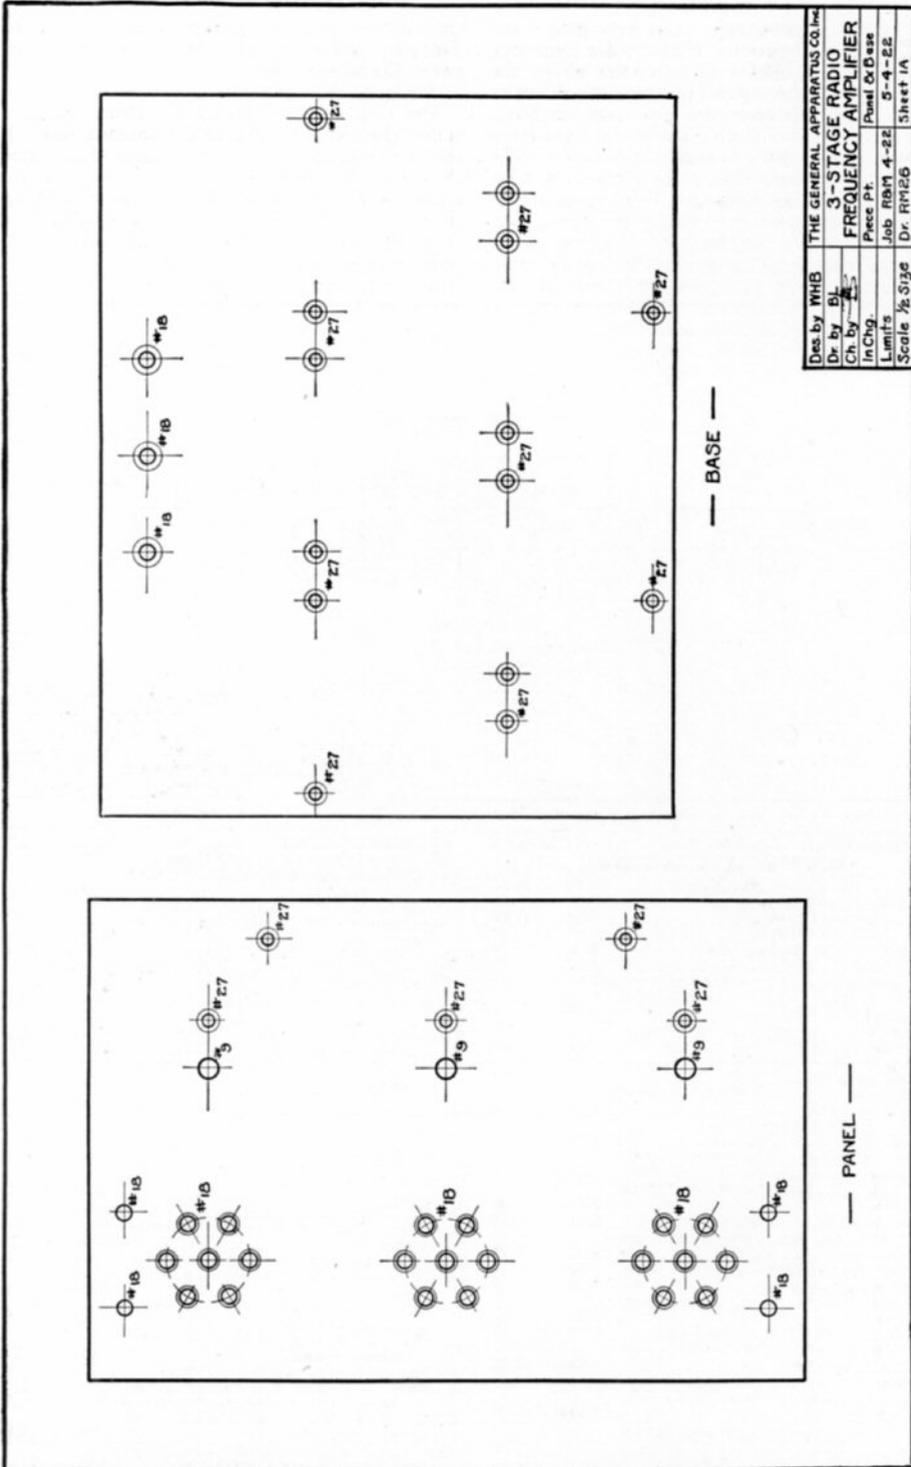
The panels are of standardized sizes, bringing the work down to a matter of laying out from half-size drawings and drilling the holes
